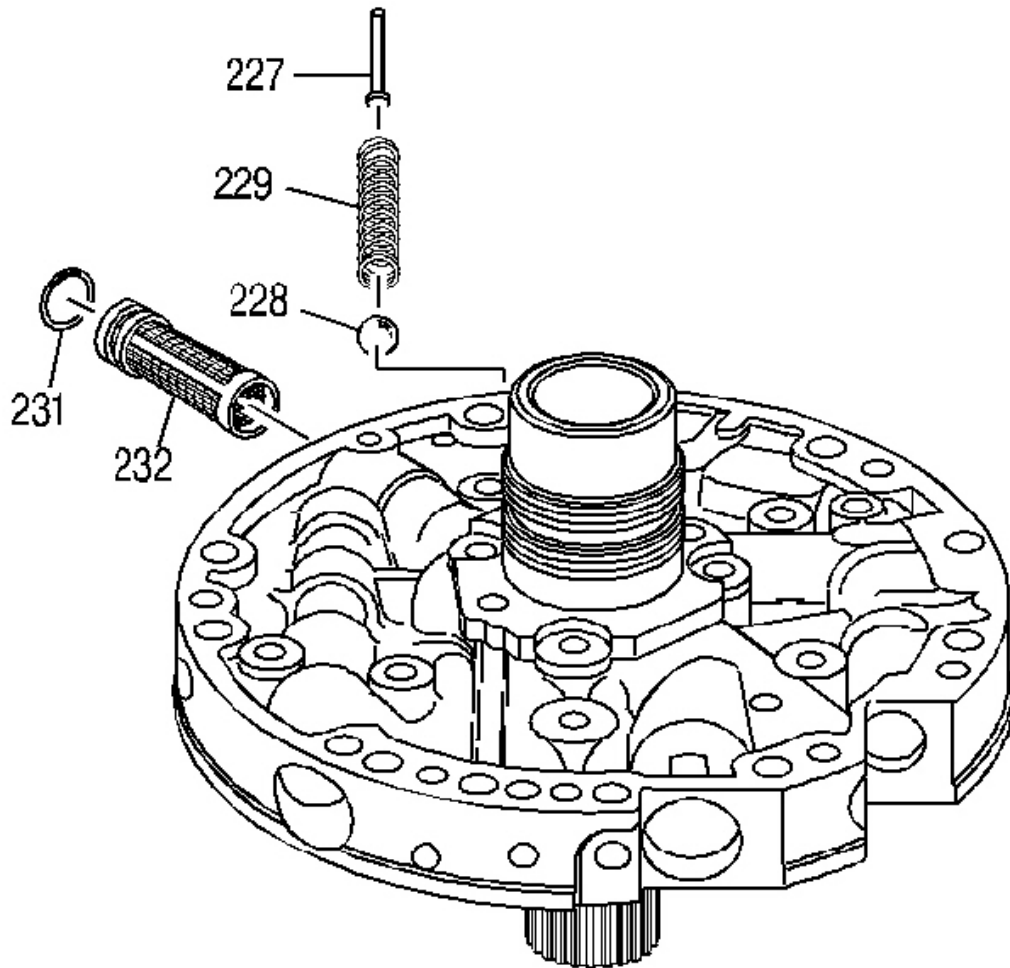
Removing Oil Pump Cover Screen & Pressure Relief Components
